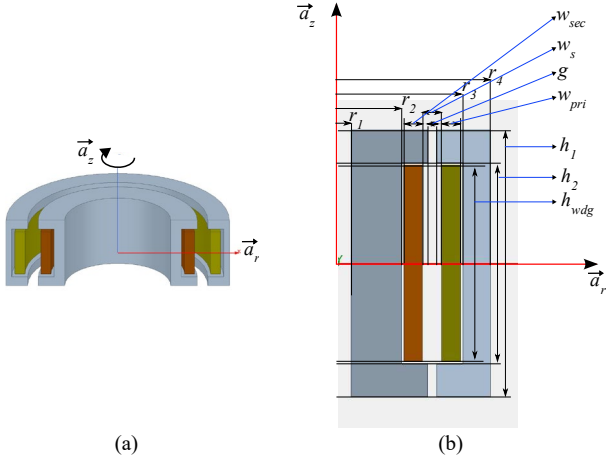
(a) Radial type Rotary Transformer and (b) Side view geometry with secondary inner winding and primary outer winding [16].
